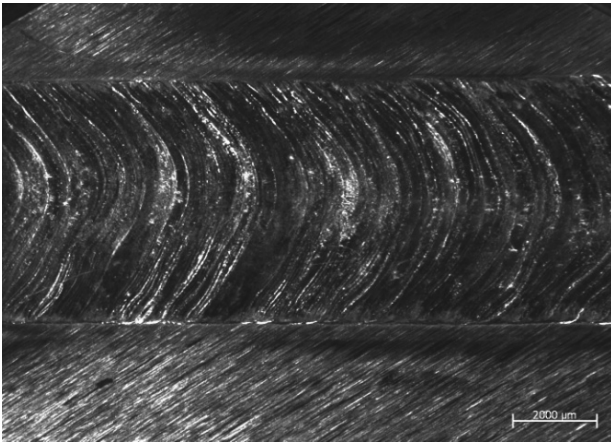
Part shape of bead face of the high speed steel HS6-5-2-5 surface alloyed with the TiC, laser power 1.7 kW
